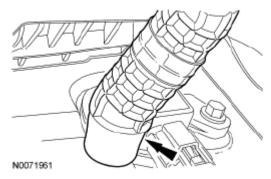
Locating Wiring Harness Retainers Courtesy of FORD MOTOR CO.
